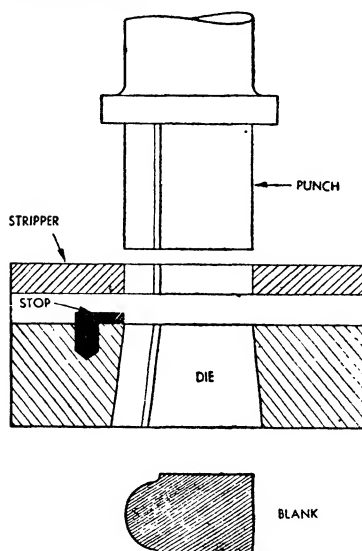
Slugs, or blanking dies, are used as shown, to cut flat sheet metal.
